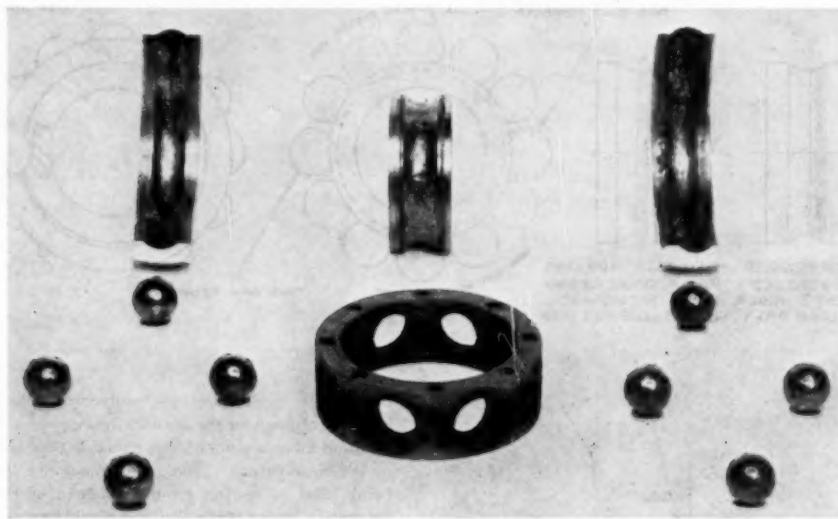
BEARING PARTS AFTER FAILURE TO BALL-SKIDDING STAGE, SHOWING INDENTATION OF INNER RACE DUE TO PRELOADING
